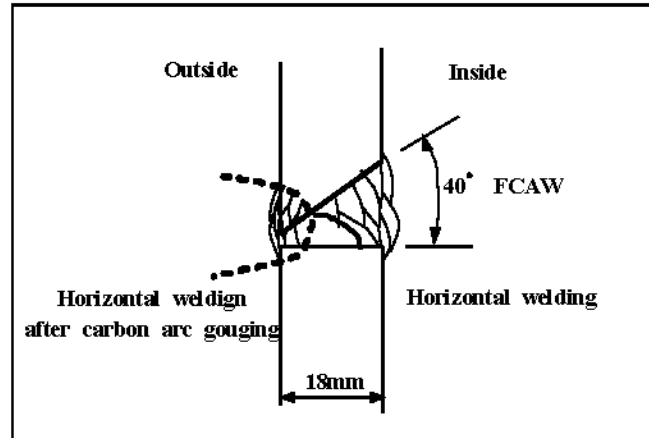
Schematic diagram of previous used horizontal welding process
